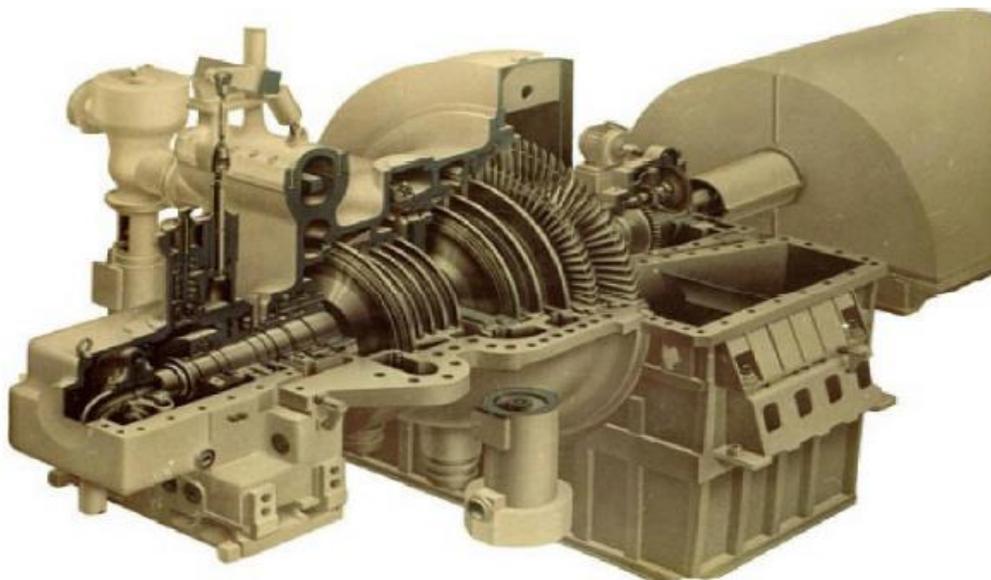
SECTIONAL VIEW OF A STEAM TURBINE
